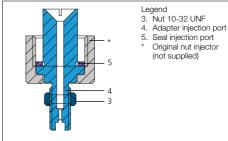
Image of the injector showing the SilTite FingerTite injector adapter assembly.
